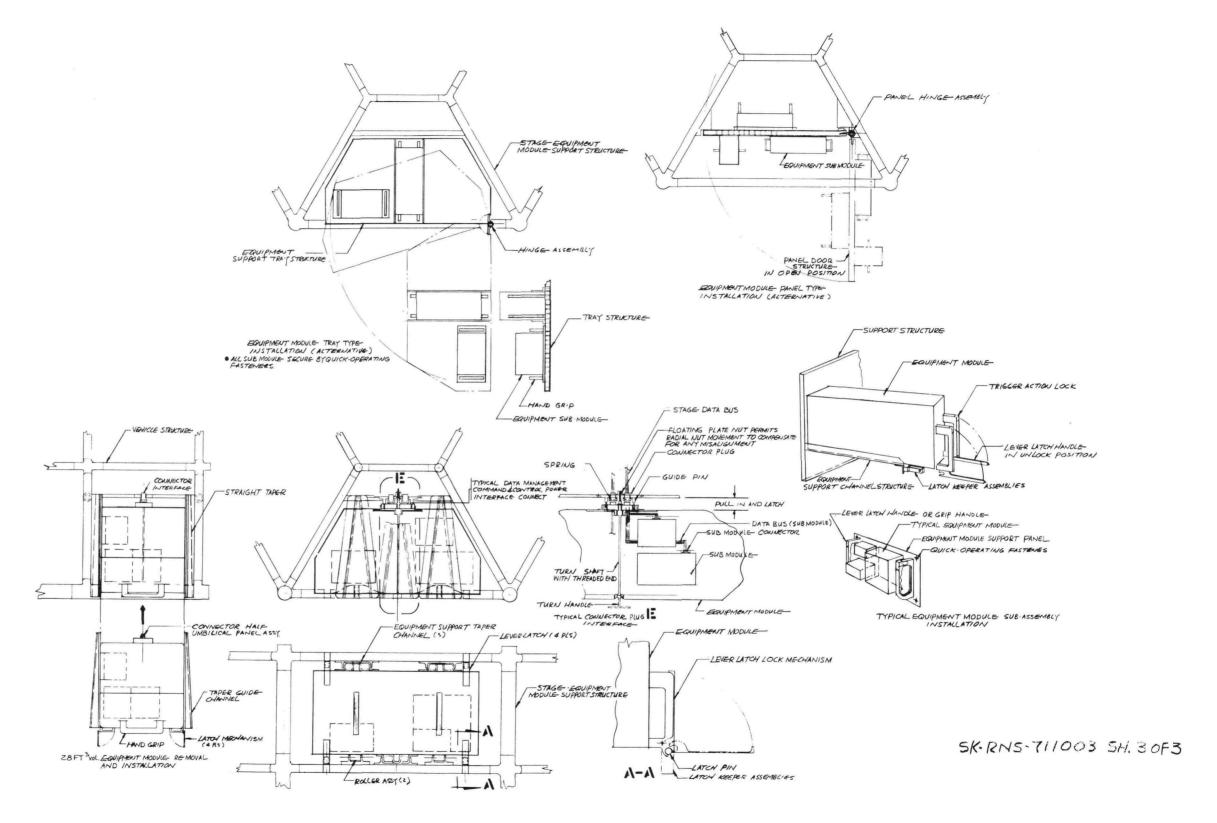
RNS Spaceframe Equipment Arrangement - Installation Techniques
